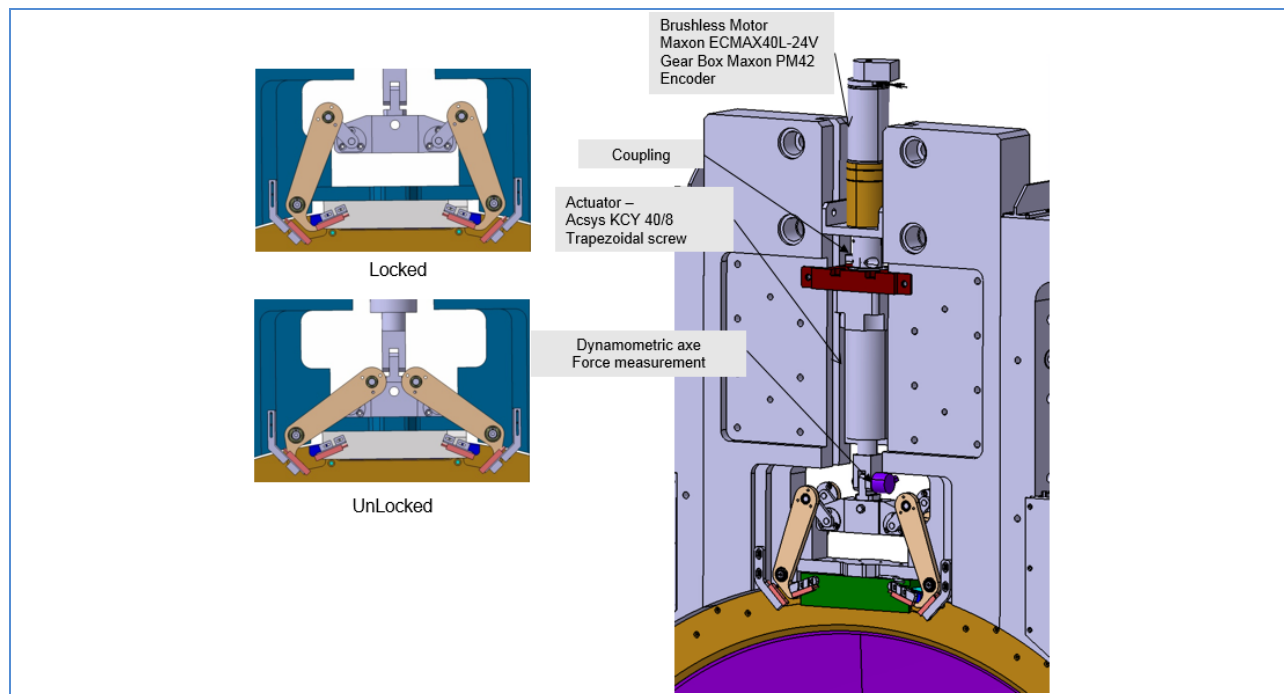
Design of the Filter Clamp Mechanism of the Loader
